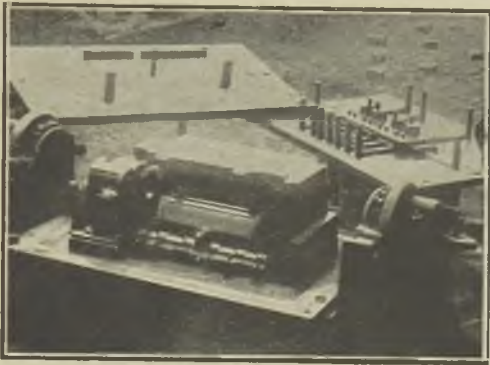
GROUP OF 4-BORE CYLINDER AND CRANKCASE PATTERN PLATES ON OSBORN MACHINE. SOME 7,000 CASTINGS HAD BEEN PRODUCED FROM THIS PATTERN WHEN THE PICTURE WAS MADE.
